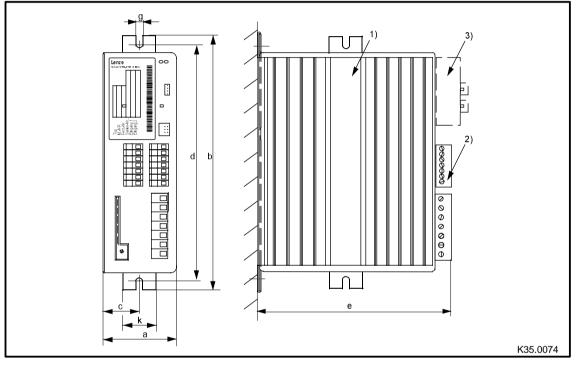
Dimensions 8201 - 8204: Standard assembly
